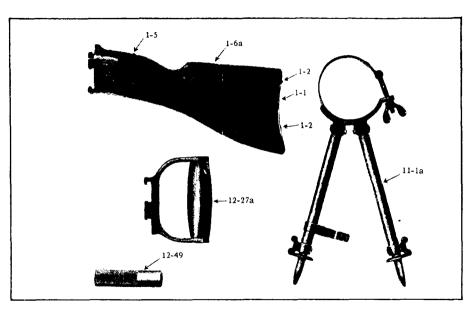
PLATE VI-BUTT STOCK, LOADING HANDLE, SPADE GRIP AND BIPOD MOUNT
